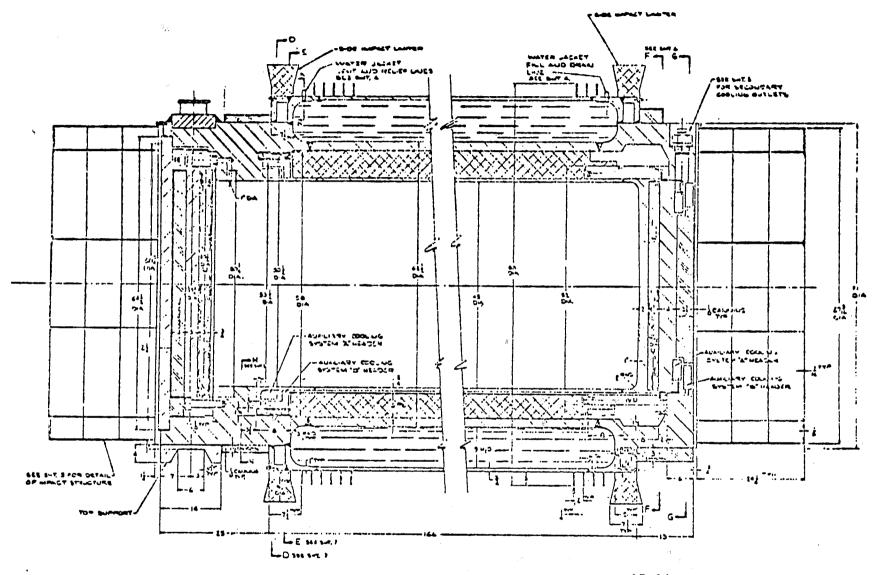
Section Drawing of the NLI 10/24 Dry Cask (5-1)
